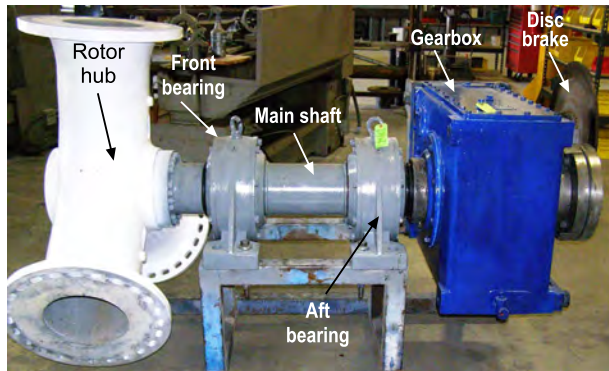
Main Shaft: Main shaft and drive train of a 110 kW geared WPP.
